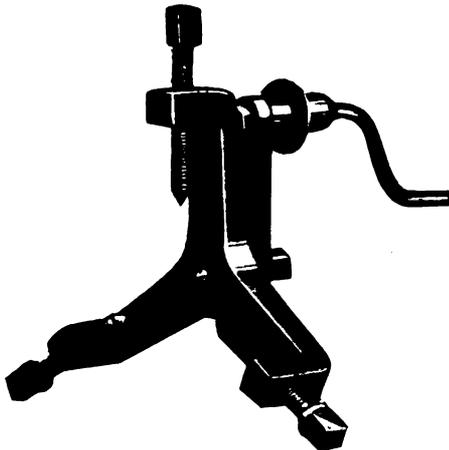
Mathot's patent "Claw" Reducing Gear.
